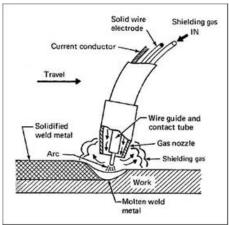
Principle of the Gas Metal Arc Welding Process (Eltxtric, T.L. and T.L. Electric, 1973)
